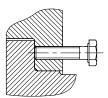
Tapped jacking hole for loosening coupling part 3 (3)
